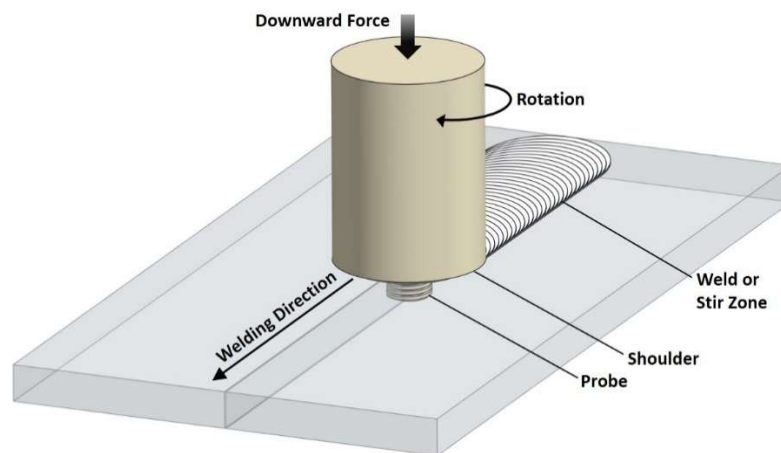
Friction Stir Welding Setup and common terms.
